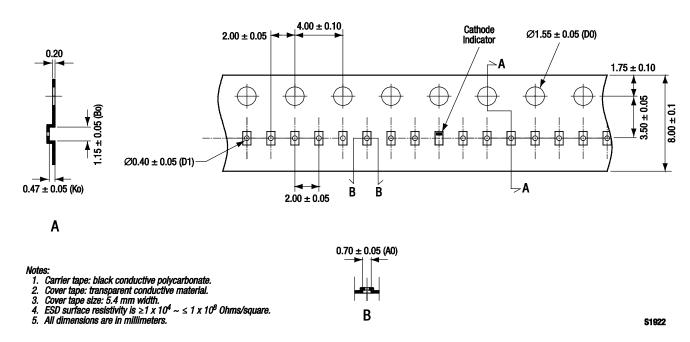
SMV1763-040LF Tape and Reel Dimensions
